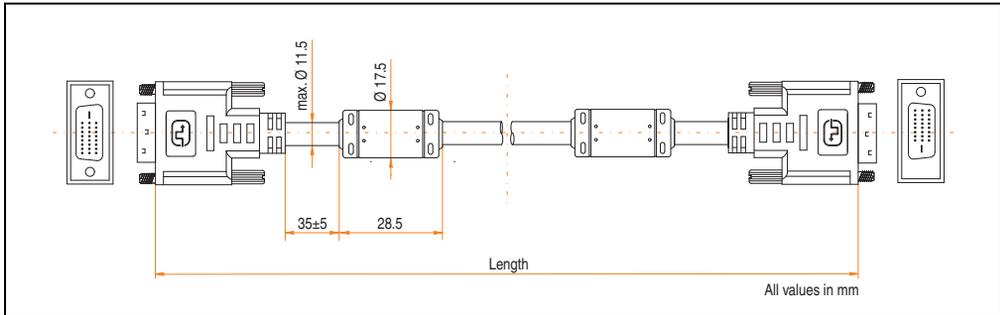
Dimensions - SDL cable 5CASDL.0xxx-00
